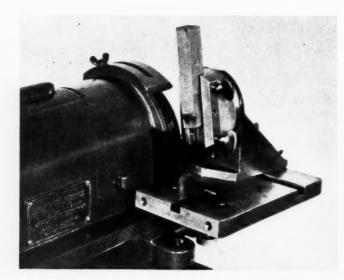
Ex-Cell-O Bench Type Carbide Tool Grinder Equipped for Grinding "Chip Curler" Groove
